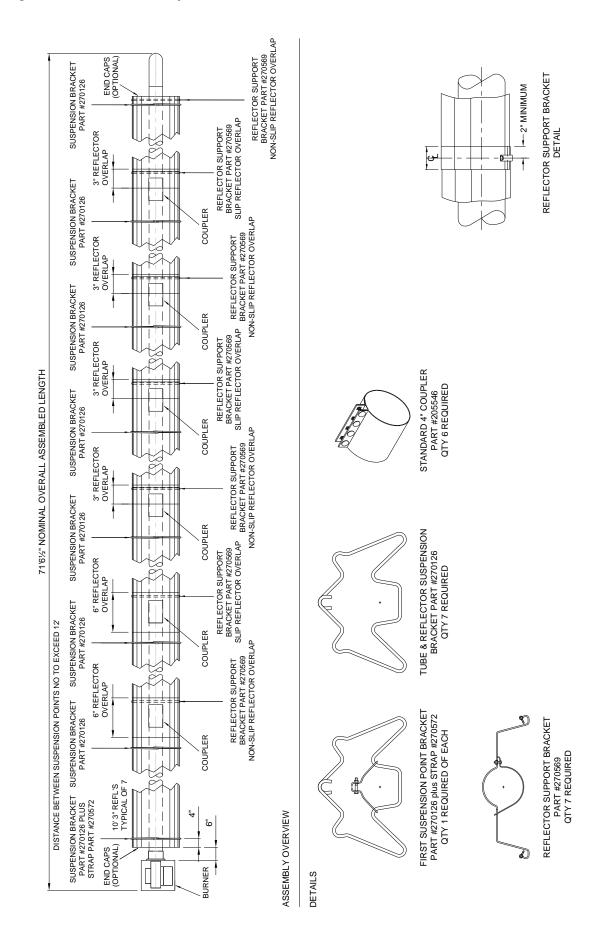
Heater Assembly: Model Linear 170-S80 and 200-S80
